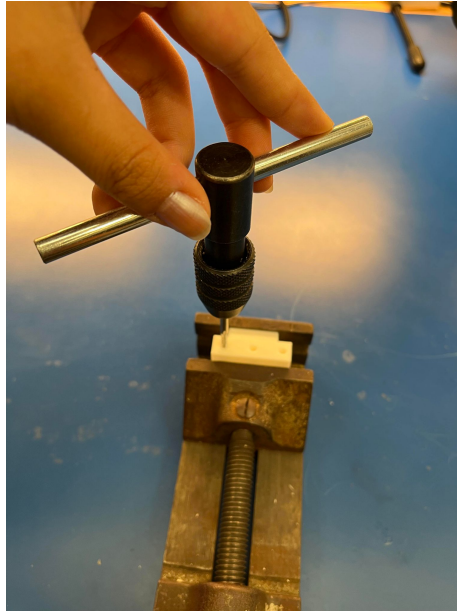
Tap the 3D printed part with the correctly size Helicoil tap
